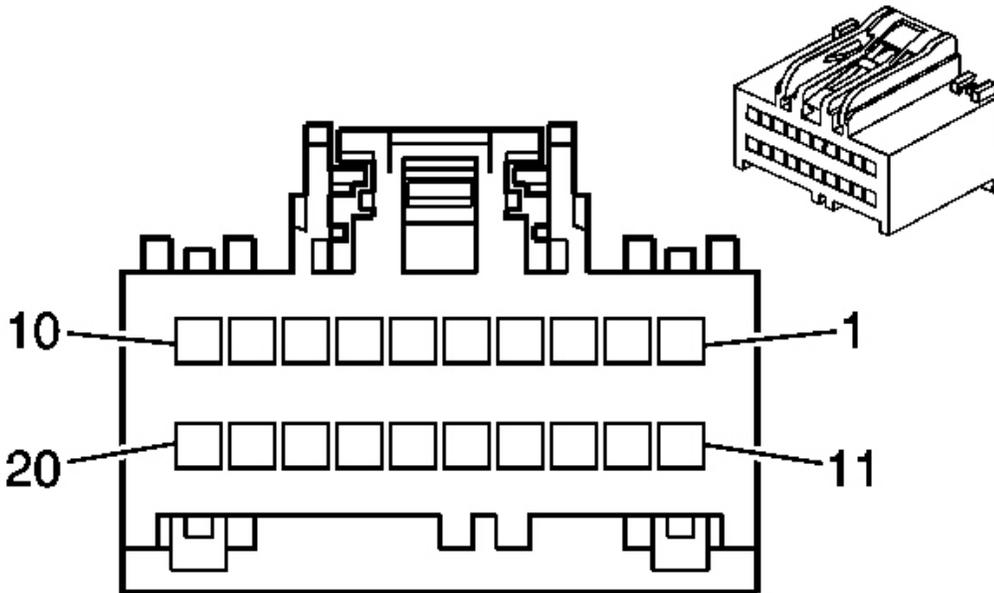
Heated Seat Control Module - Driver X4 Connector End View
